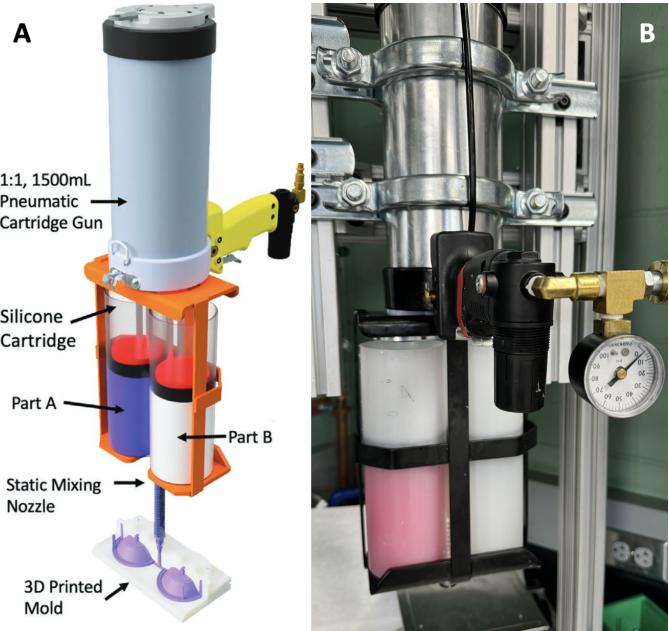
(A) Diagram of the custom, hand-operable injection molding machine as presented in Bell et al., and pictured in (B) at the MIT Fabrication-Integrated Design Lab assembled per the paper's specifications. This machine allows for rapid prototyping of parts consisting of addition-type silicones featuring A and B parts which are mixed to form the curable silicone [12].
